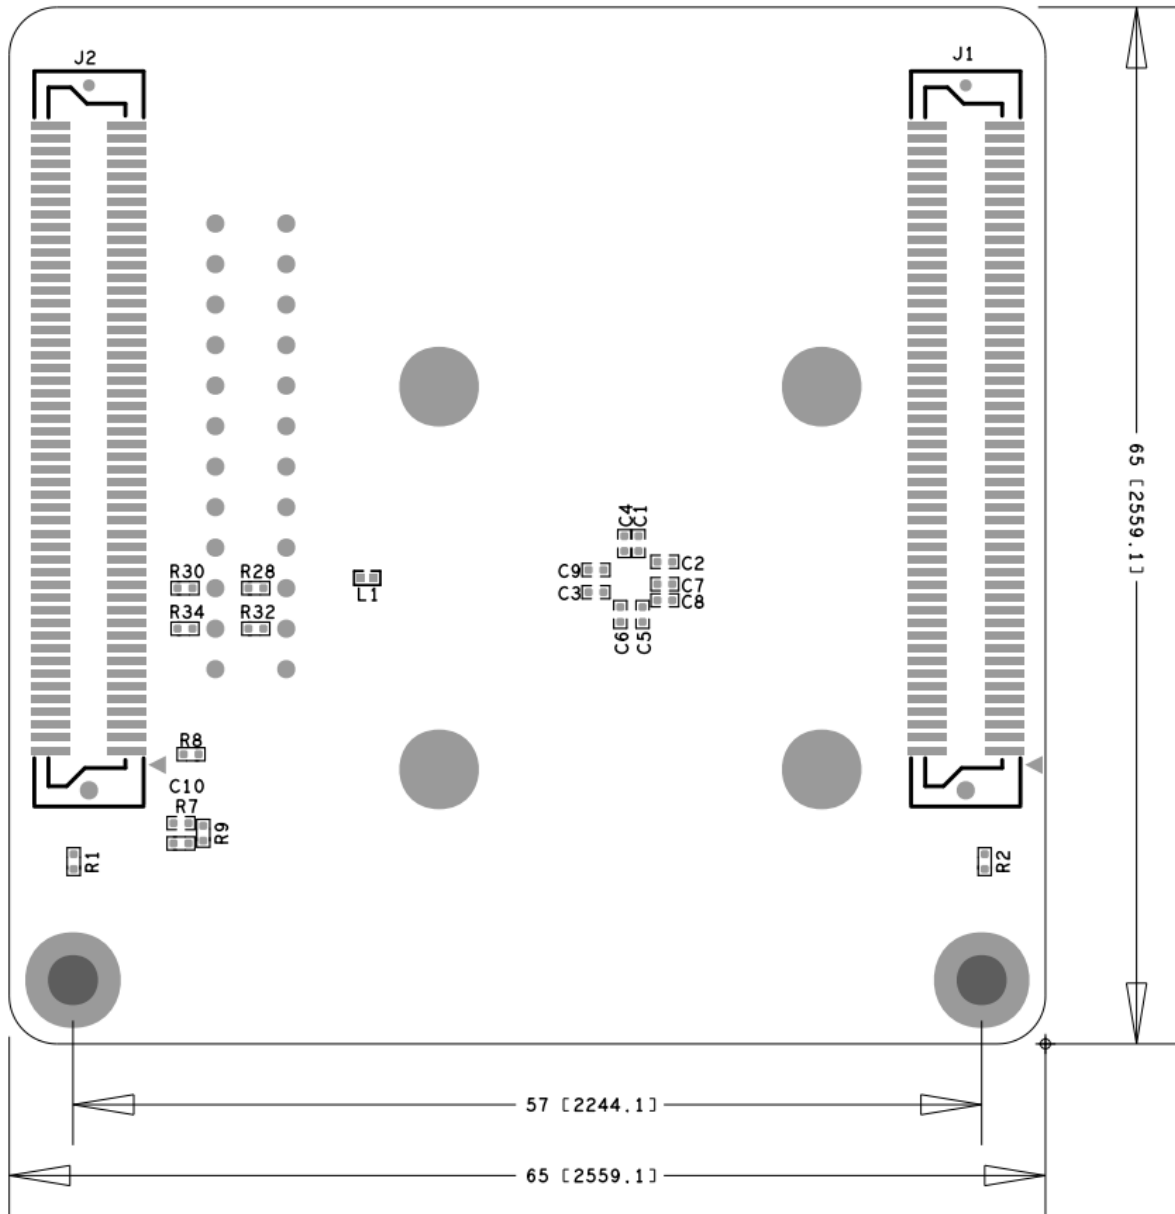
Bottom view of the Xylo™ IMU daughter board (mm(mil))
